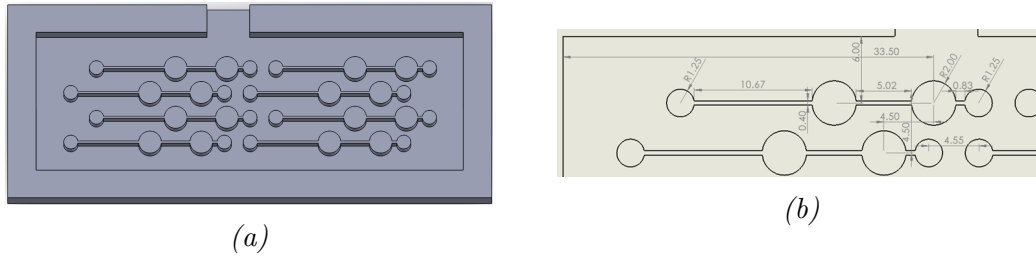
The calibration curve design with filter paper reservoir in Solidworks (a) and the zoomed-in technical drawing with top view (b).
